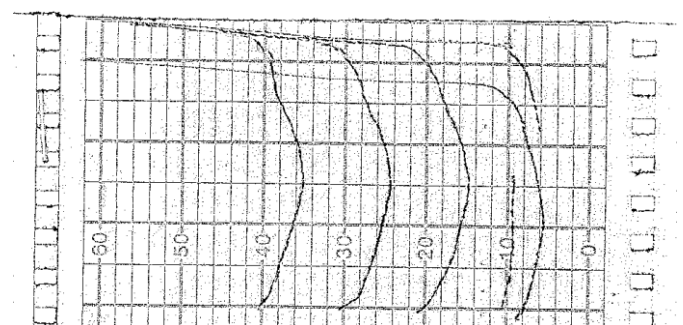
Gear profile of 4 teeth of Gear A manufactured on WEDM.
